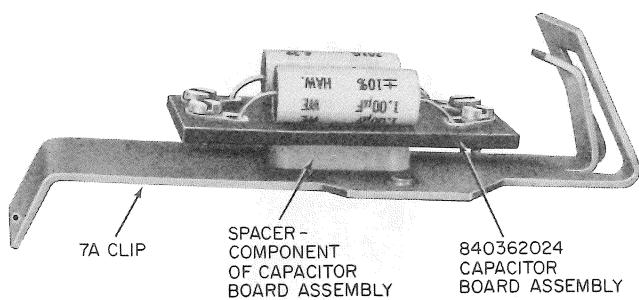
Capacitor Board Assembly Mounted on 7A Clip
